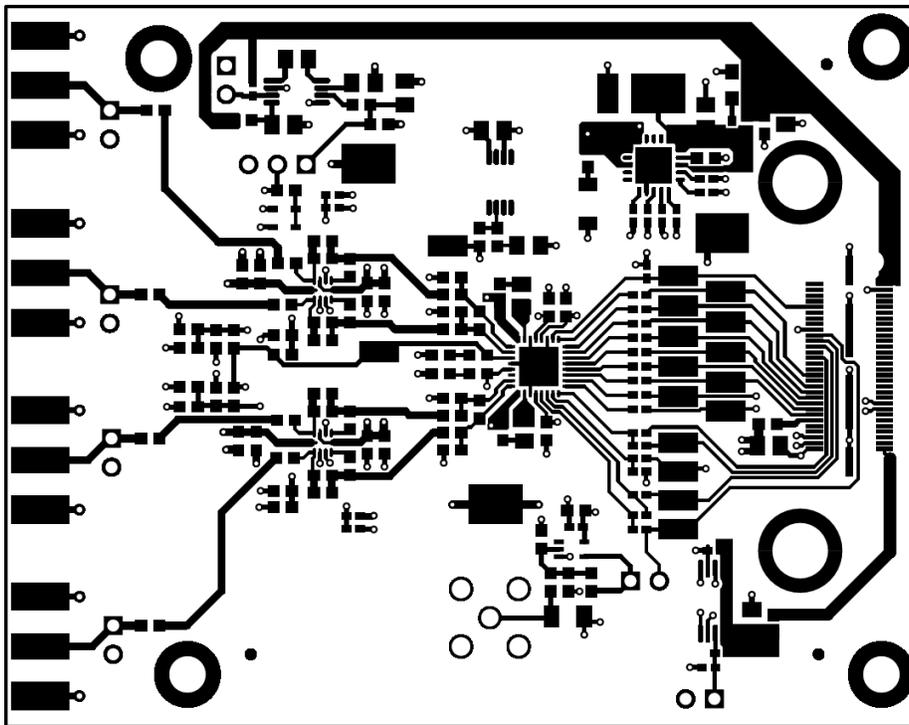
ADS9224REVM PCB Layer 1: Top Layer
